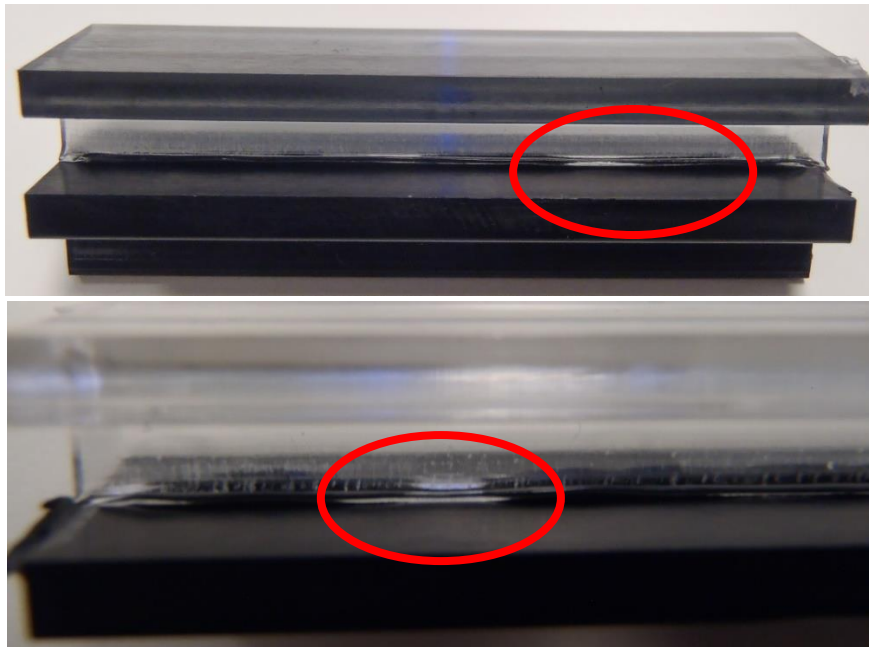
Welding result in the test 3-B (Table 5-1), sparkle in the burr
